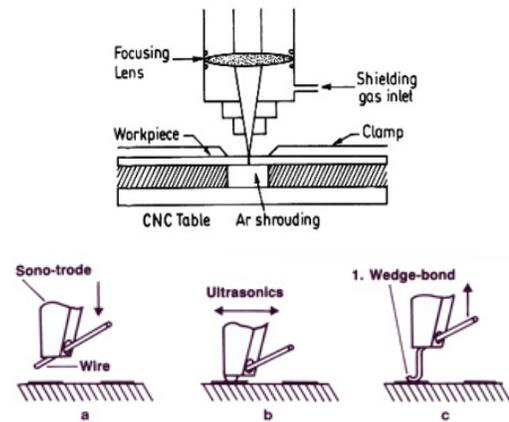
Welding Processes Used in Vehicular Wiring Systems
